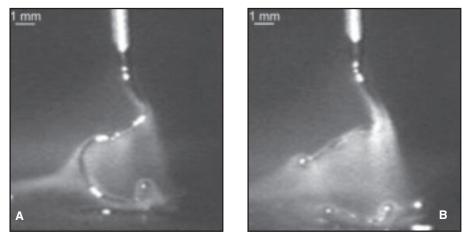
The breakup of the long filler metal string as a result of short circuiting with the surface of the workpiece.
